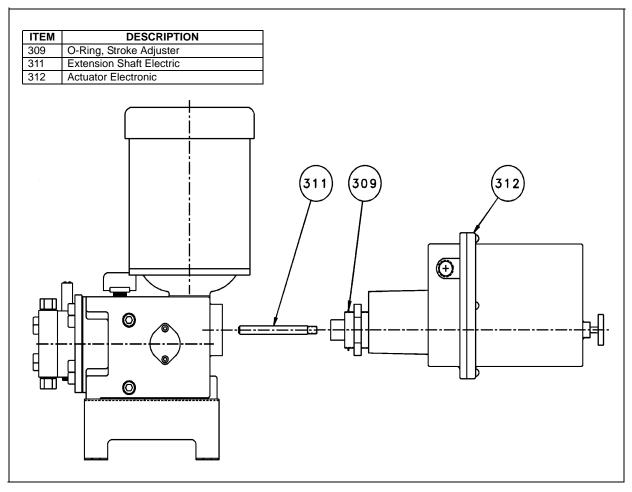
Electric Stroke Adjuster Assembly (Optional).
